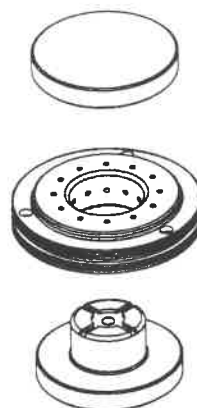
The spindle from a small roundness gage was the first application of diamond turning to air bearing manufacture.
